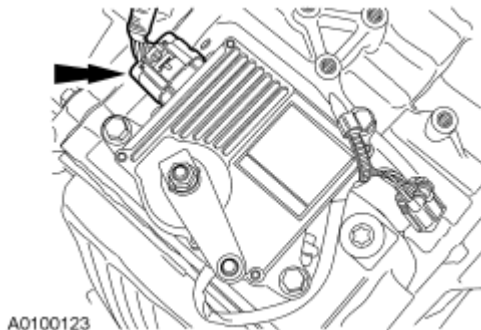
Identifying Electrical Cover For Starter Motor Electrical Connectors
